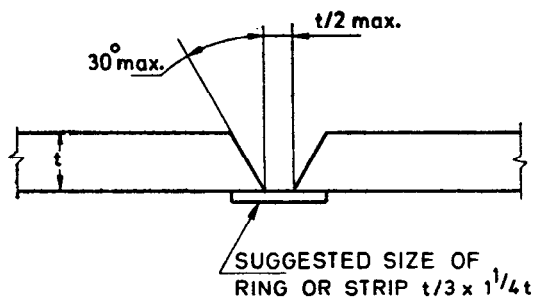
SINGLE WELDED GROOVE-JOINT WITH BACKING
